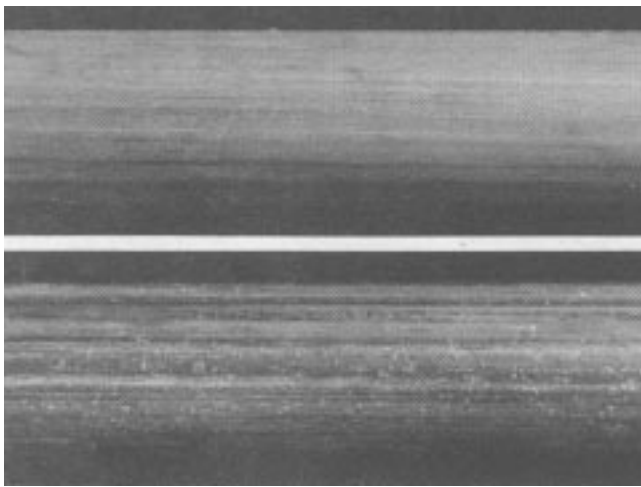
Close-up views at mid-length of 51-mm (2-in.) tubes extruded with a steel cone (Tube 5B, upper) and glass pad (Tube 10C, lower). 0.43 \times
